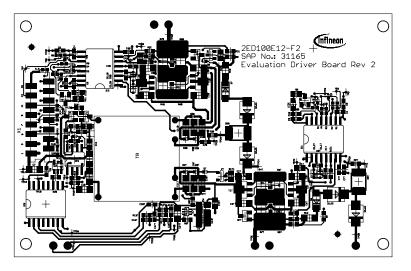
Assembly drawing of the EconoDUAL™ driver board
